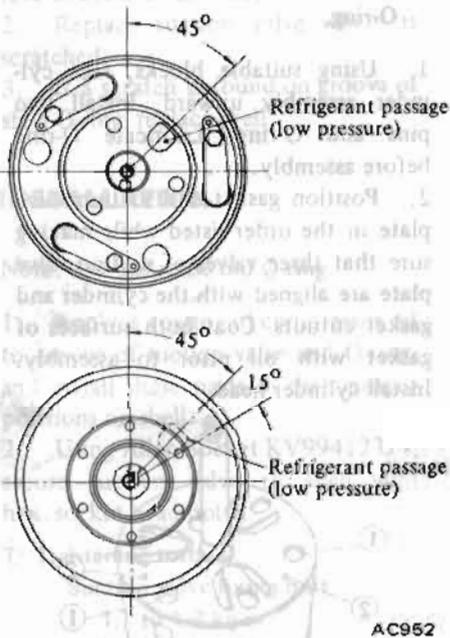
Relative Position between Cylinder Head and Front Cover
